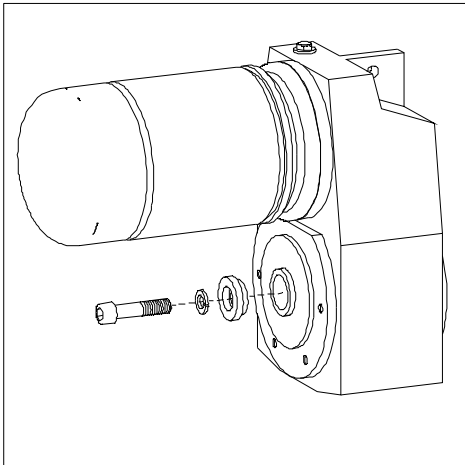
Fastening the Driveshaft Figure 2.2.4c-Tightening the Pressure Screws
